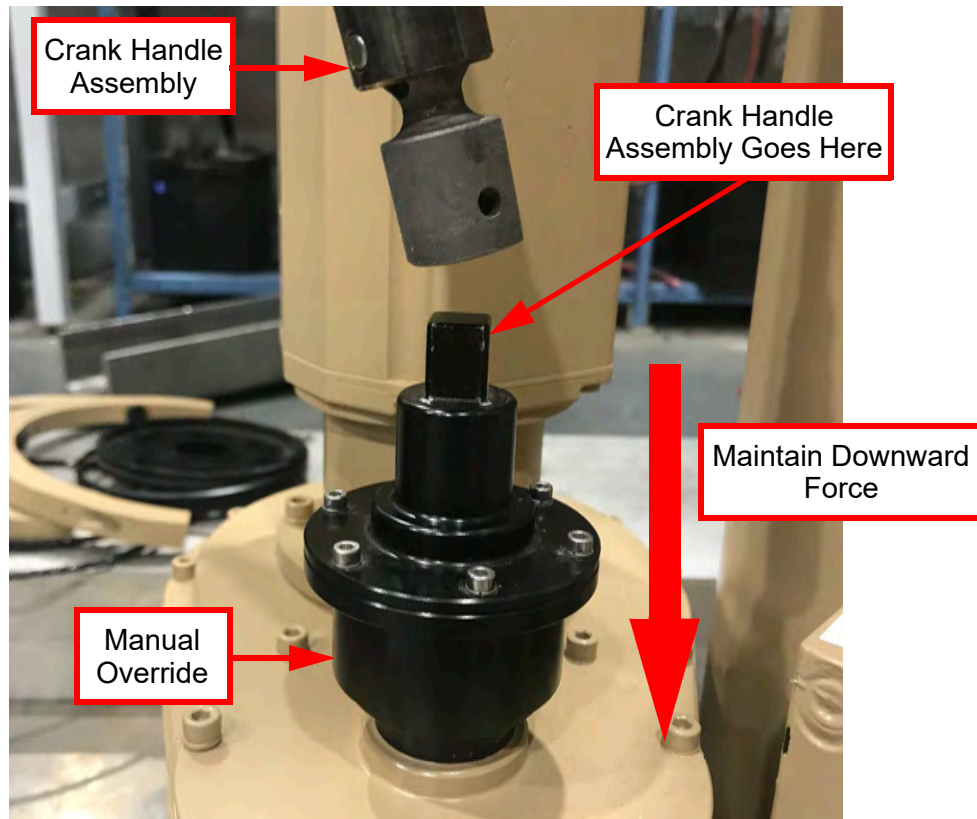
Place Crank Handle Assembly onto Manual Override
